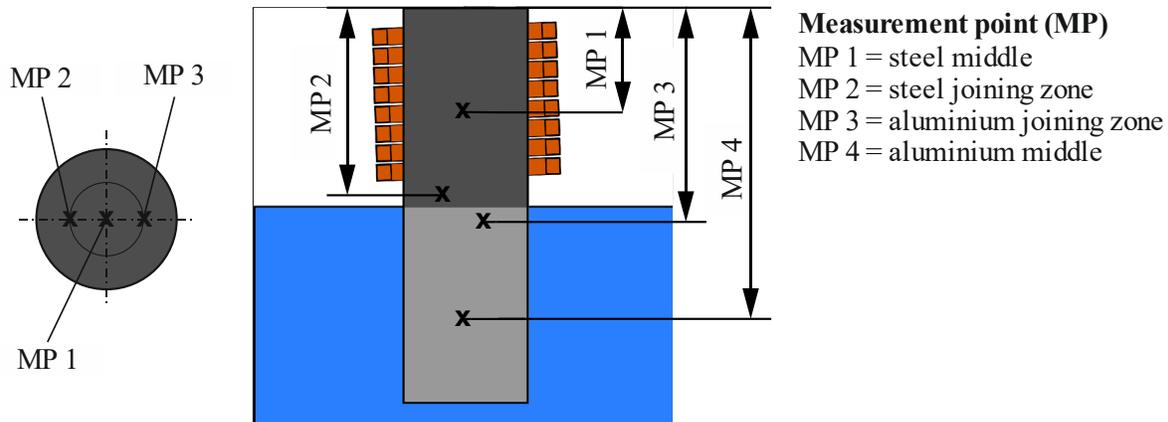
Scheme of immersion cooled shaft workpiece during inductive heating with marked measurement points (MP).
